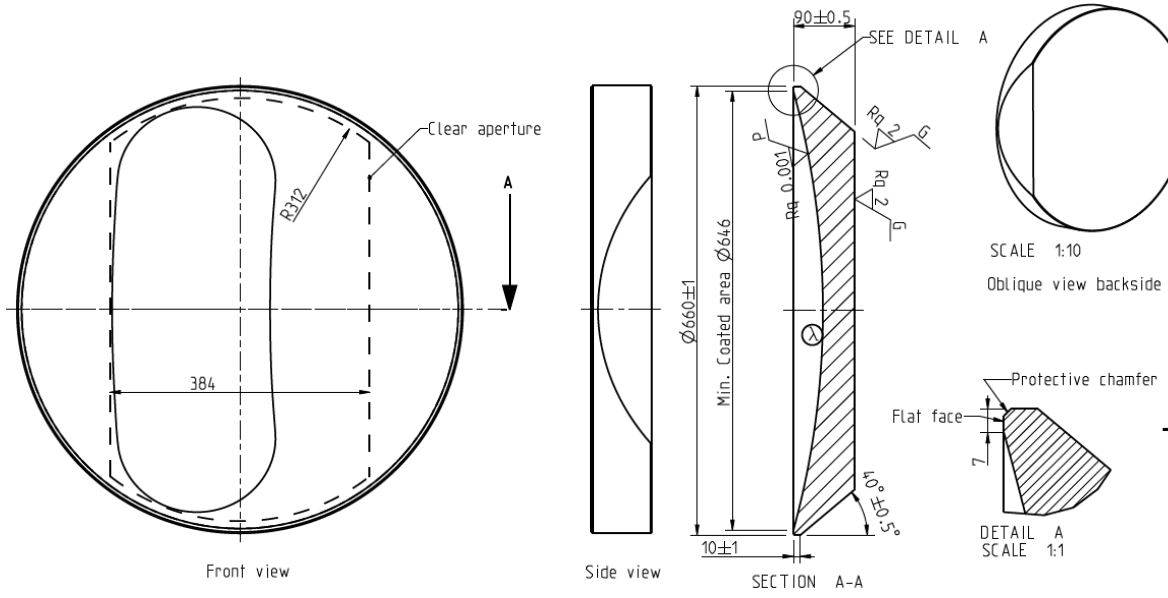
A section of the WEAVE collimator mirror manufacturing drawing.
